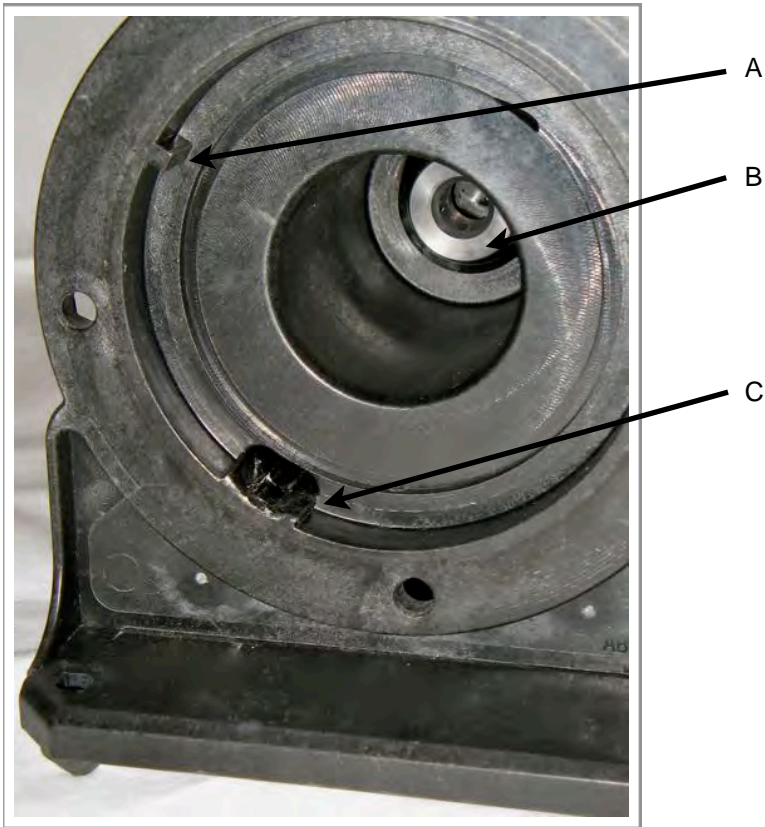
Rear bearing seat, guide lug, and flushing opening
